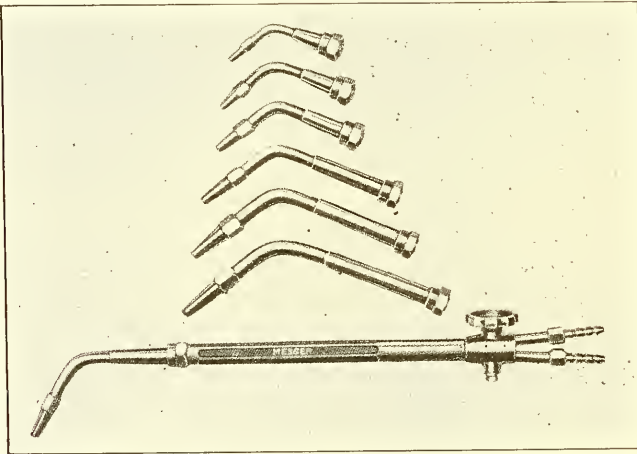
The Messer Welding Torch and Tips.
